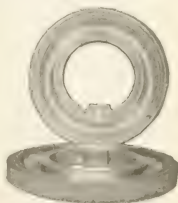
AEROPLANE TIRE INNER TUBE PRESS MOLD.
